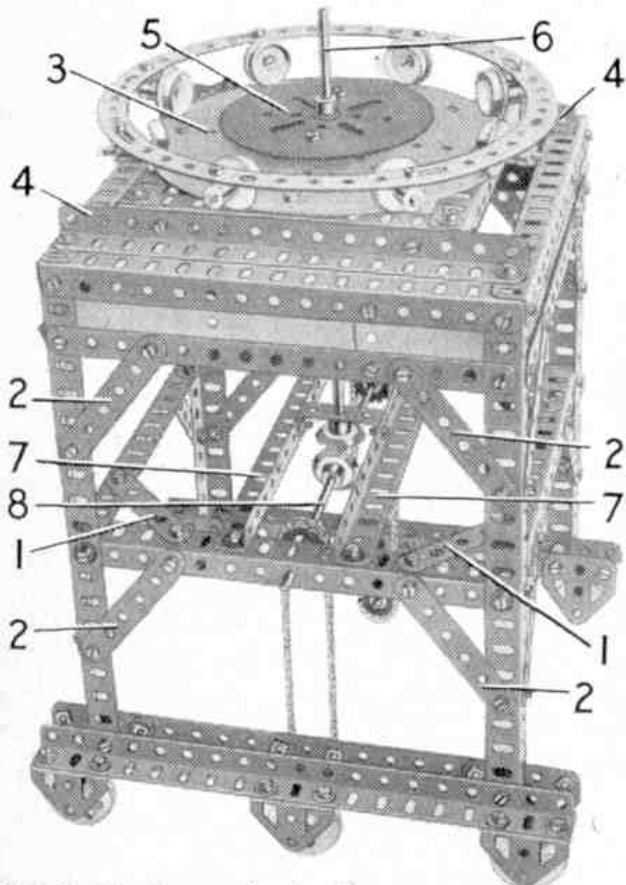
The tower, showing the drive to the travelling wheels, and the roller bearing.
